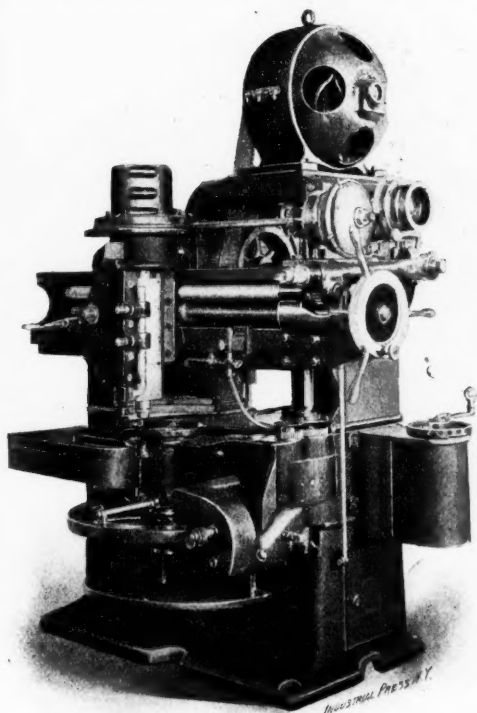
Detail of Feed for Special Automatic Milling Machine.
